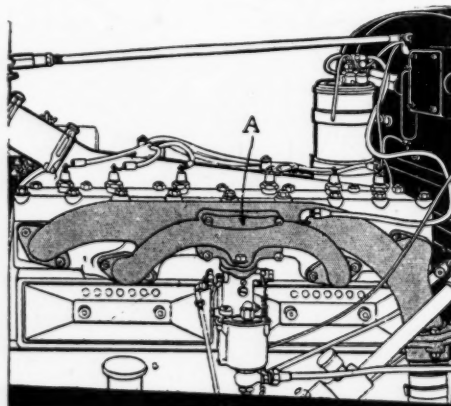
Exterior of Chalmers engine, showing location of hot-spot
